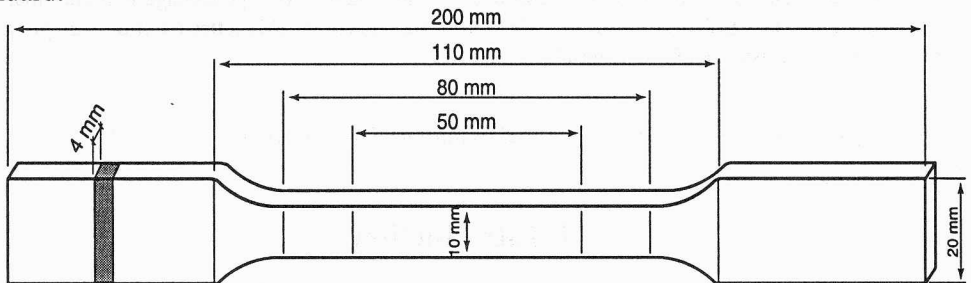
Geometry and dimensions of the specimens (ISO 527-2-specimen type 1A) subjected to fatigue tests
